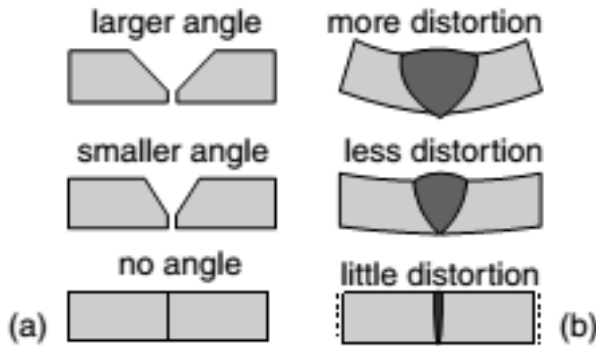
Reducing angular distortion by reducing volume of weld metal and by using single-pass deep-penetration welding. Modified from TWI (7).
